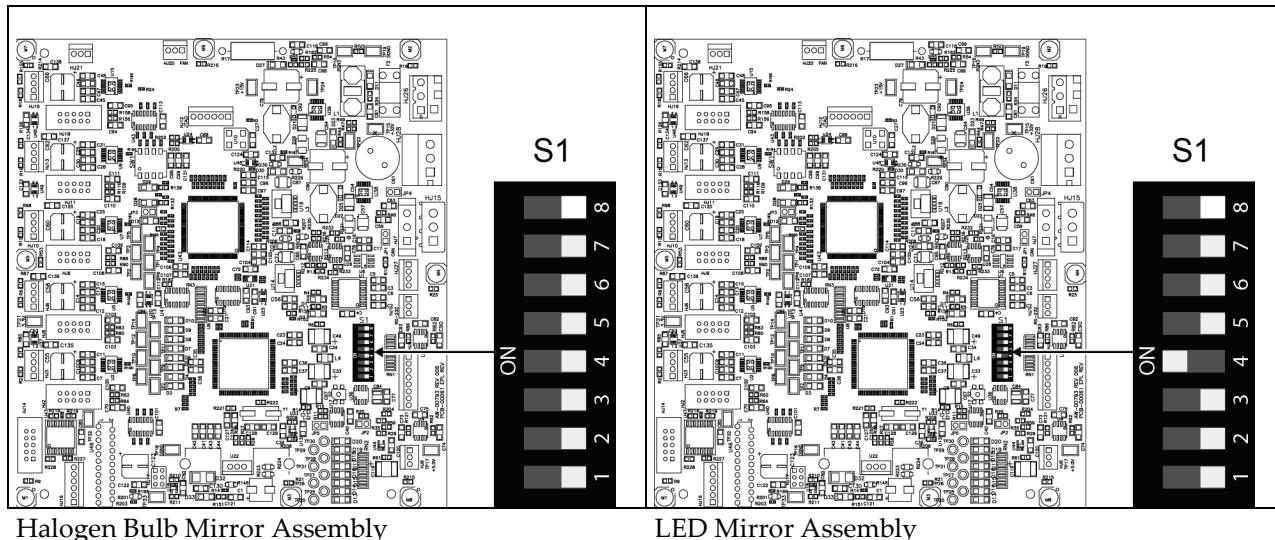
PCB-00061 Dip Switch S1-4 Configuration
